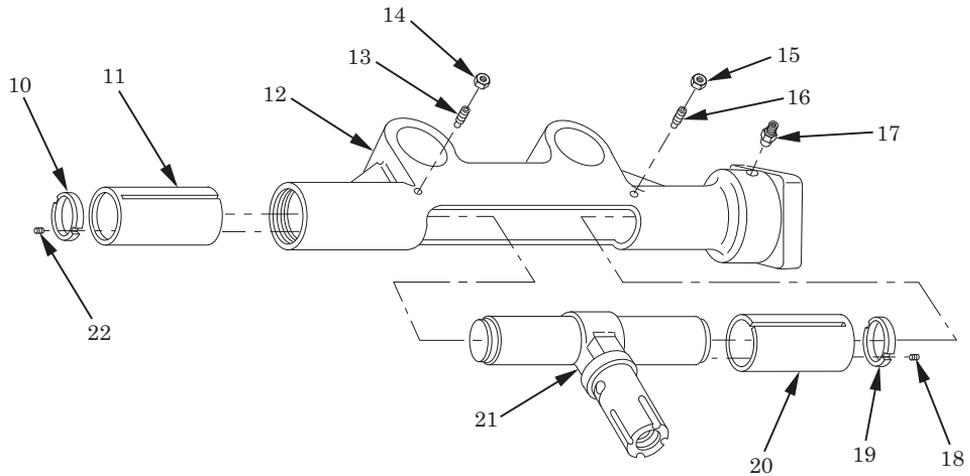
Disassembly of Traversing Gear Housing Assembly.
